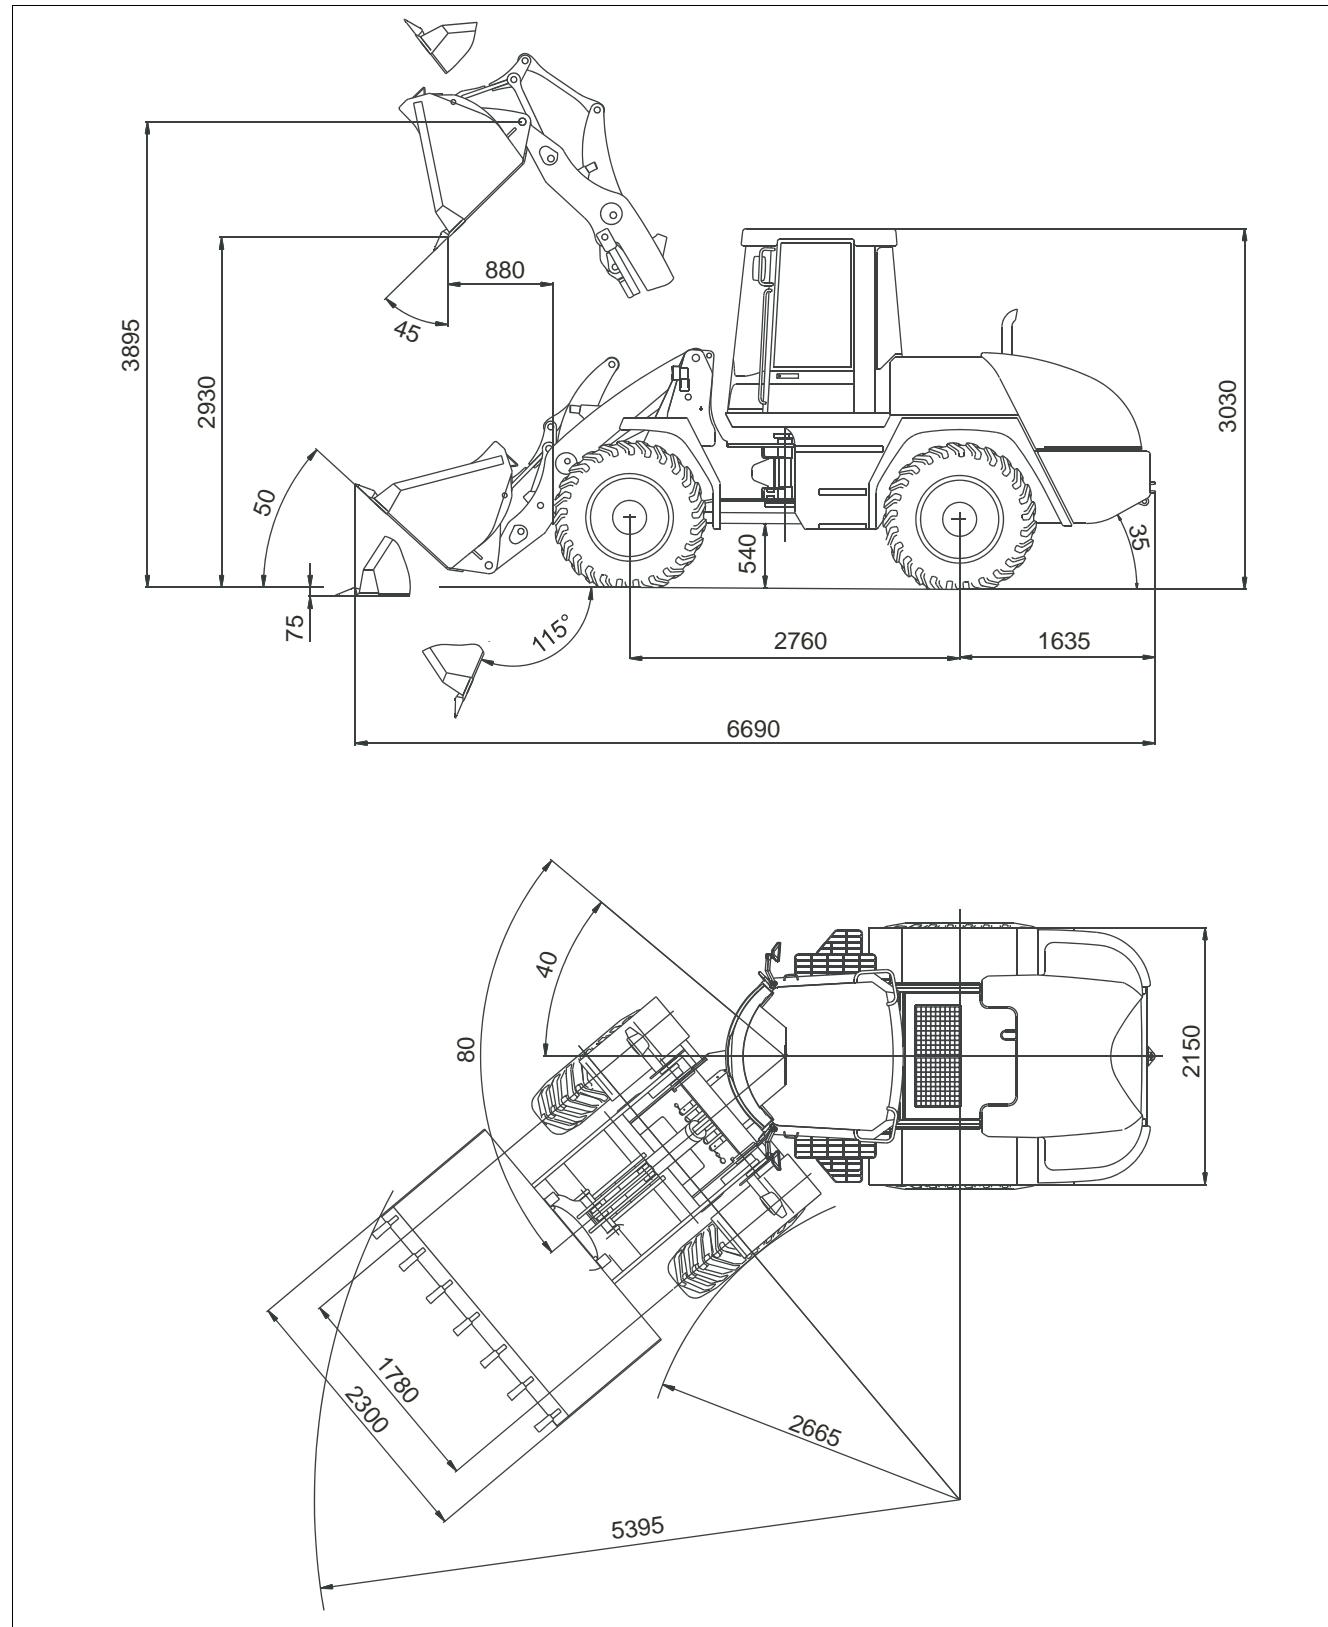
Dimensioned drawing with bucket and tires 15.5 R 25
